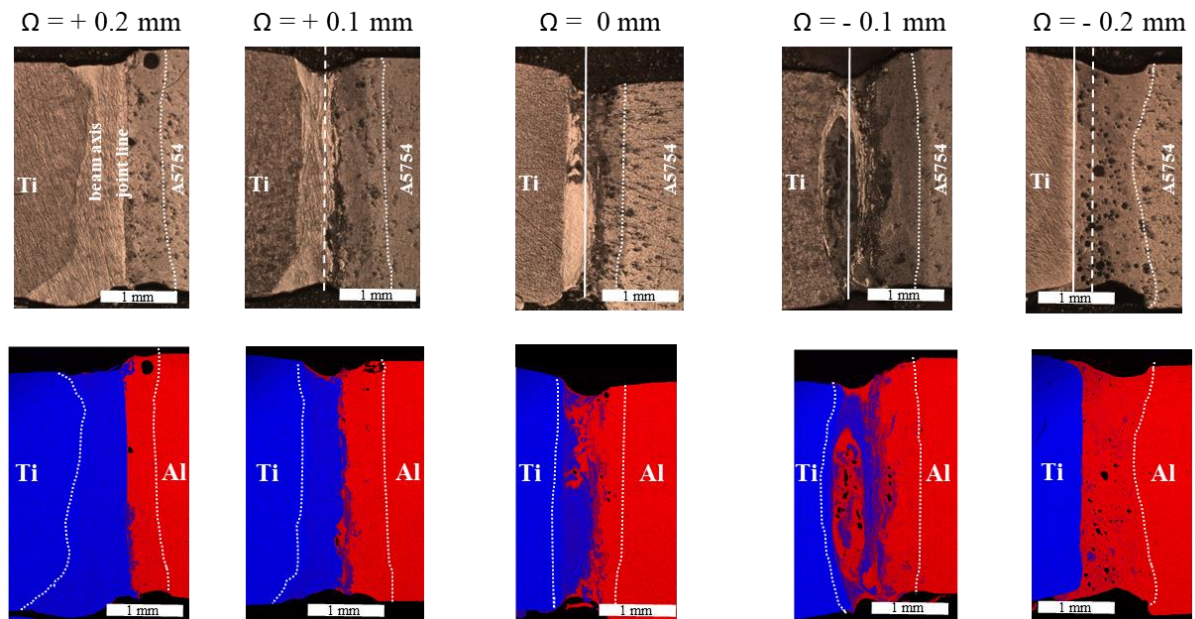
Optical microscopy and combined X-map view of weld crosscuts corresponding to the different beam offsets (laser power 3 kW, welding speed 3 m/min).
